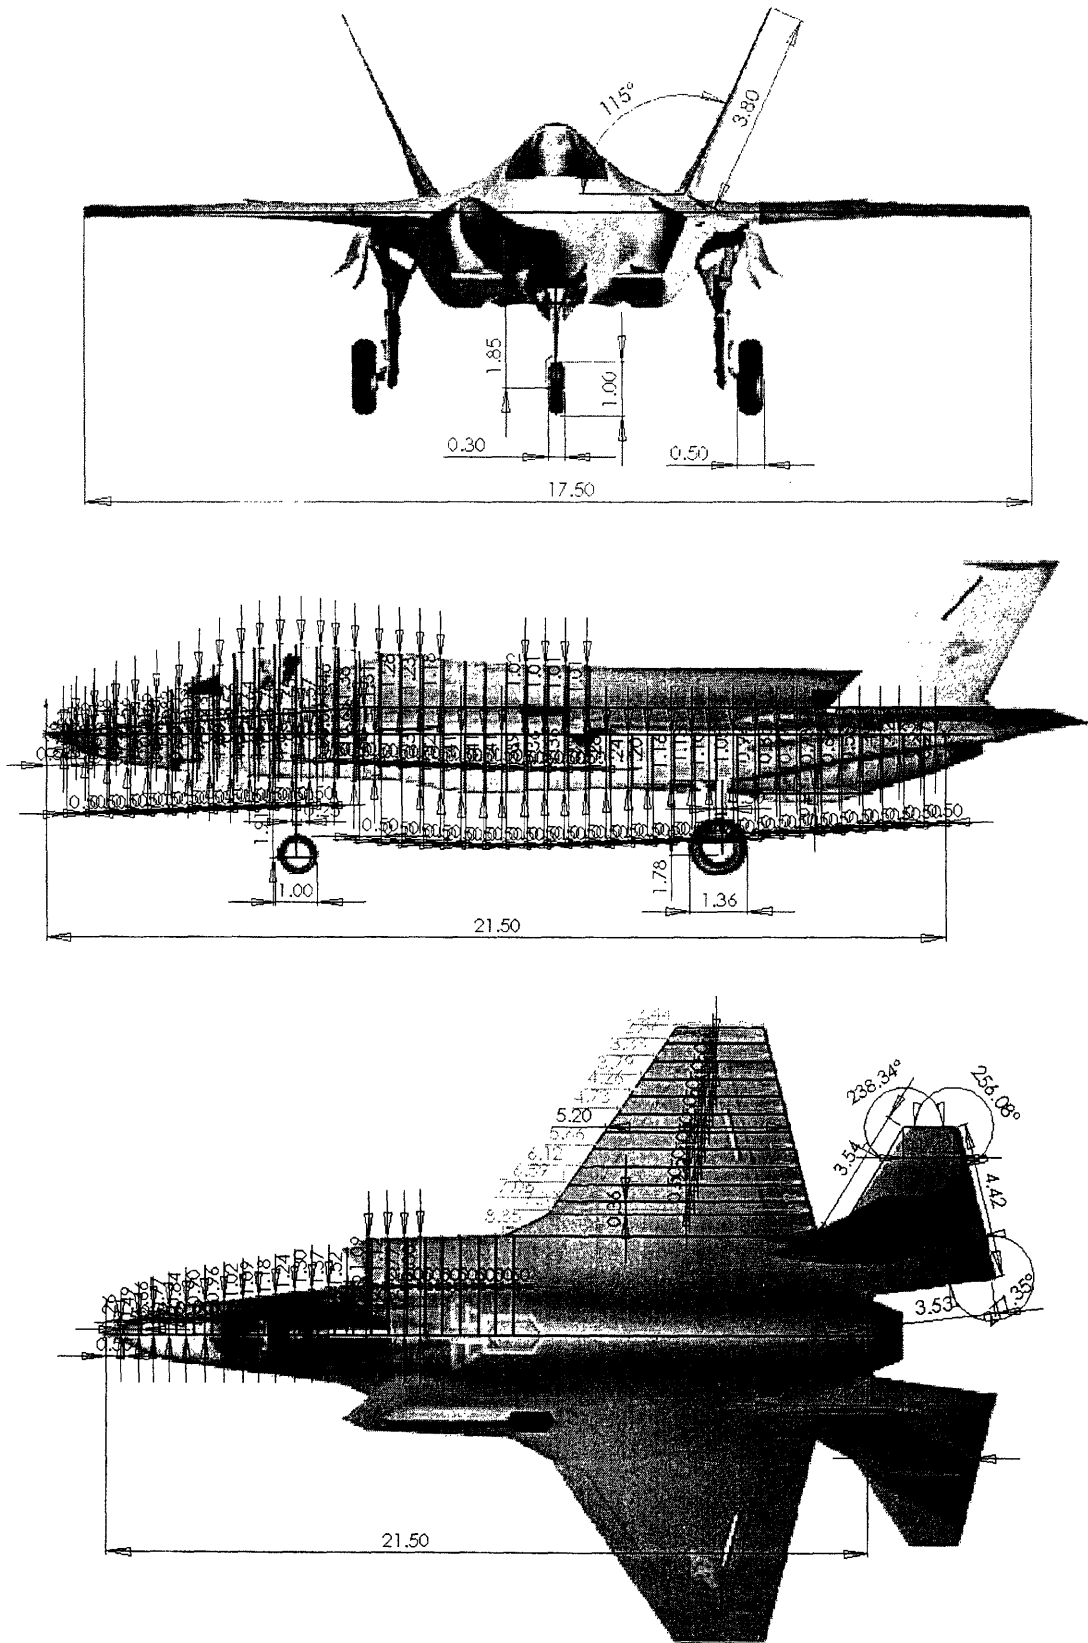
Dimensioned front, side, and top views of the F-35A scaled model.
